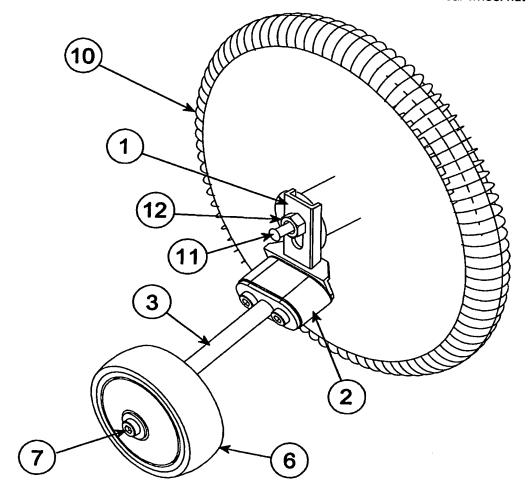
Training wheel assembly connected to bicycle rear wheel axle – perspective view (NB. One assembly only shown: two assemblies required, one each side of rear wheel)
